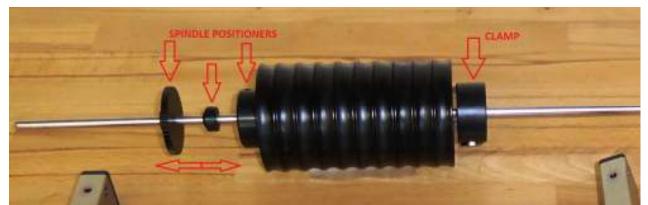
Spindle with 10x spacers & clamp (you might need readjust spindle positioners-see page 12)
